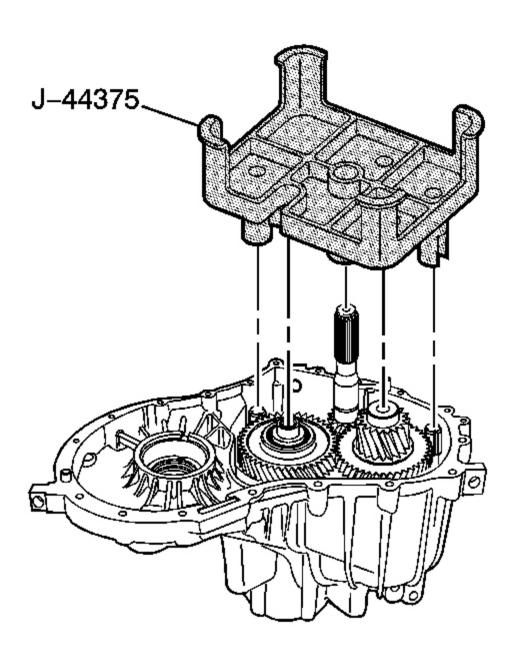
Identifying J 44375 Courtesy of GENERAL MOTORS CORP.
